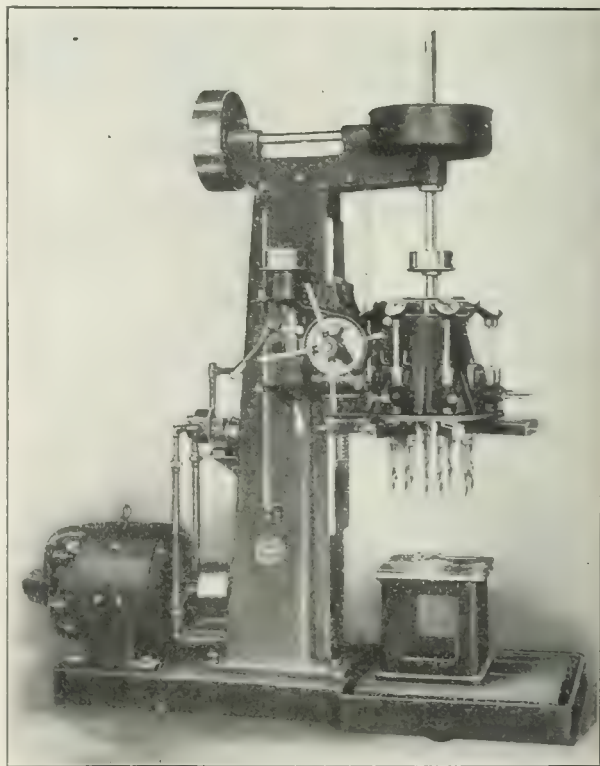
The All-Geared Multi-Spindle Drill Sold by the Walter H. Foster Company, New York.
